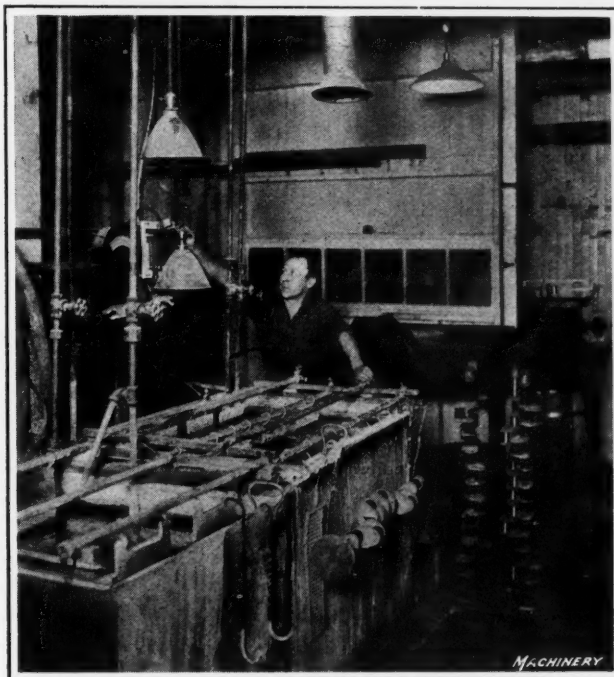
One of the Tanks employed for the copper-plating of the Crankshafts
